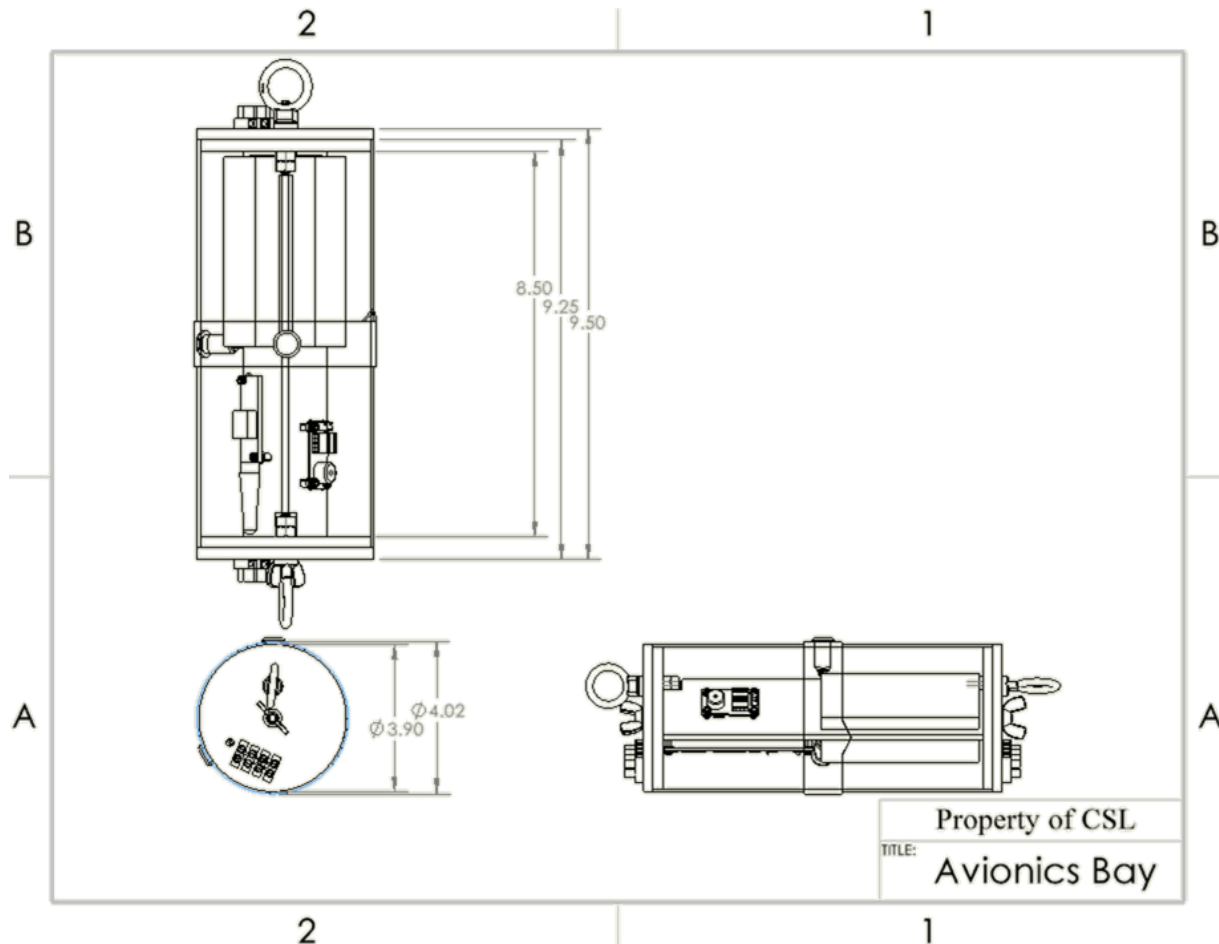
Dimensioned drawing of full-scale avionics bay.
